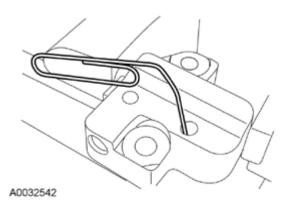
Installing Paper Clip Into Hole In Tensioner Housing Courtesy of FORD MOTOR CO.
